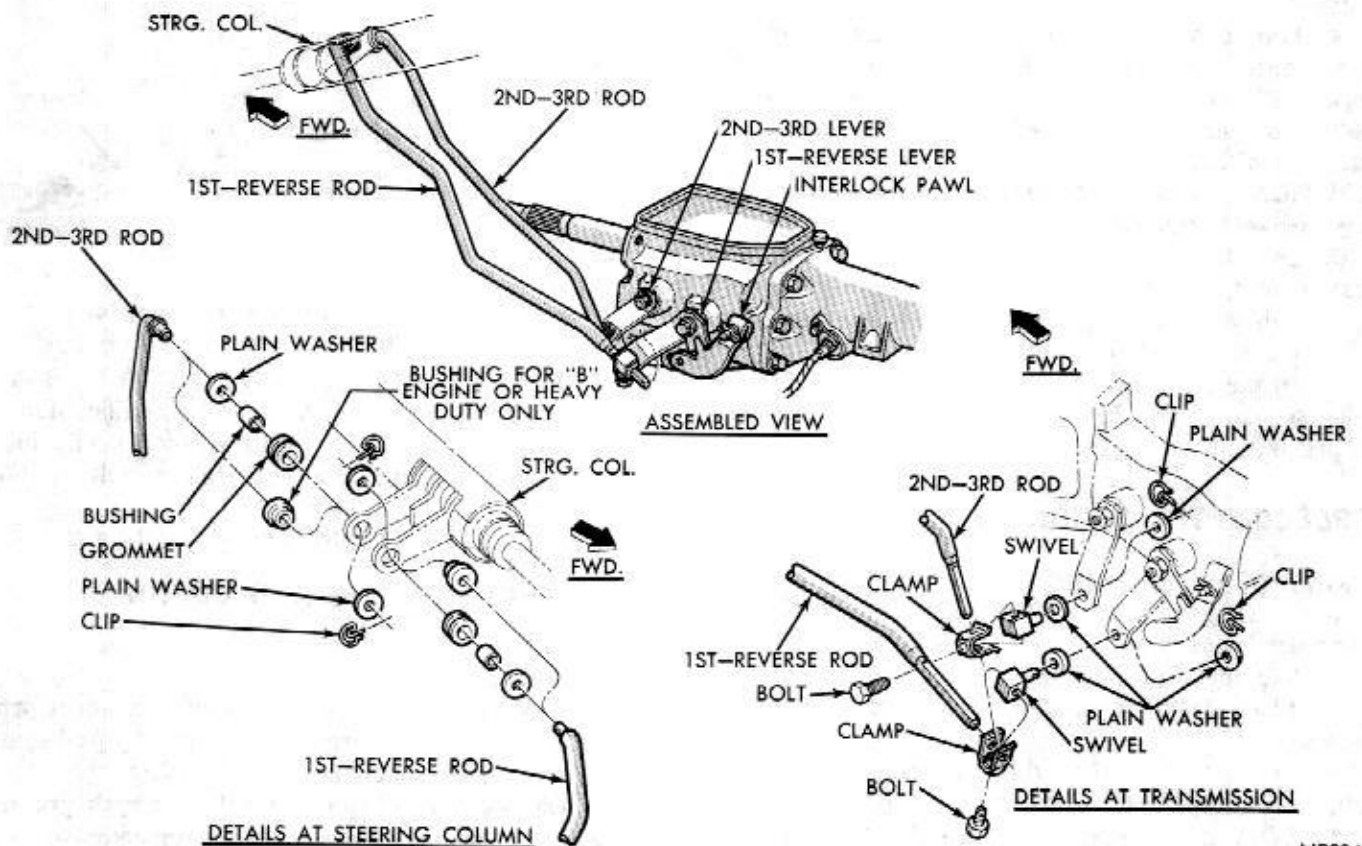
Column Gearshift Linkage (Coronet-Charger)
